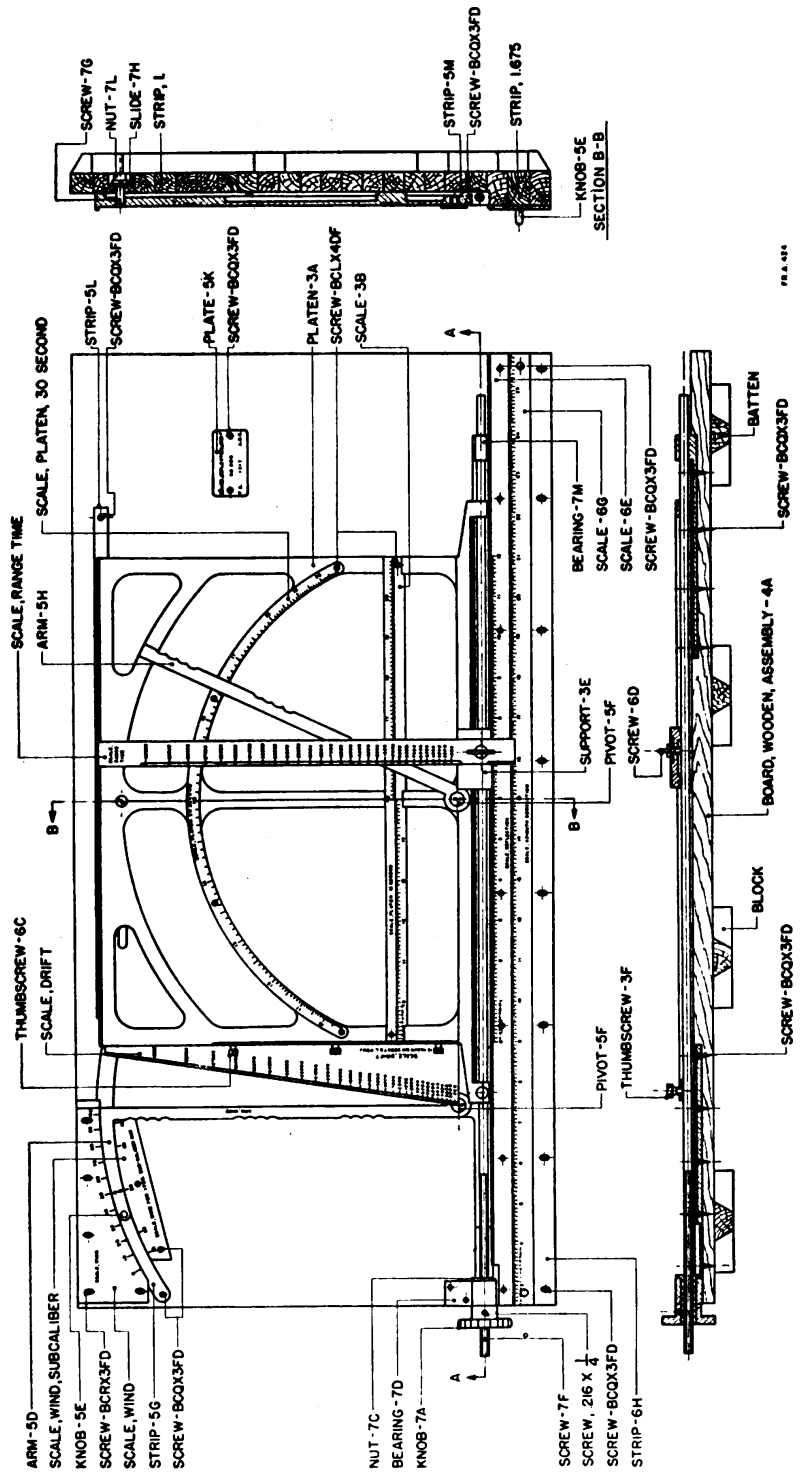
Gun deflection board M1917— assembled and sectioned views.
